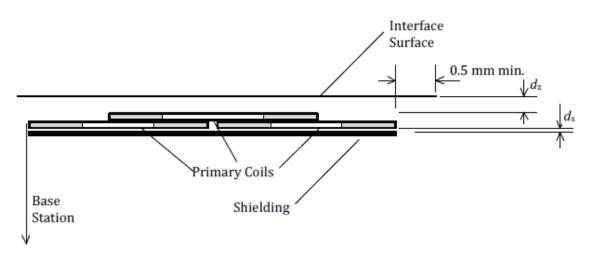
Primary Coil assembly of Power Transmitter design A32
